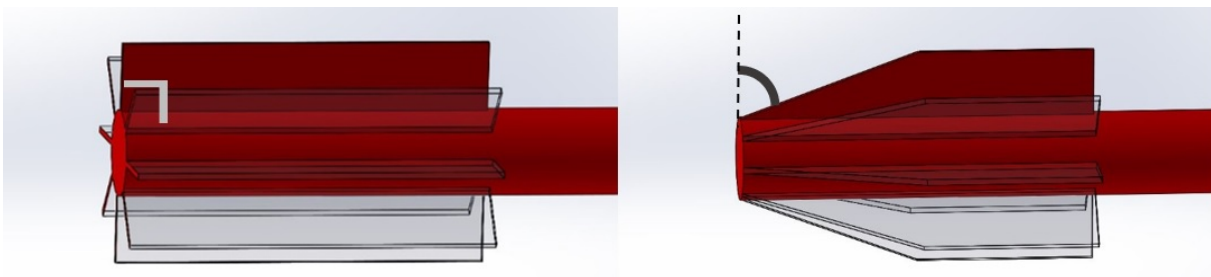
Right: Side view of the (0,0) geometry. Left: Side view of the (0,70) geometry.
